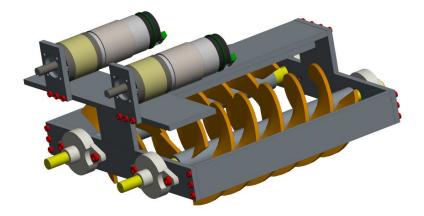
Robo-Weeder with Highlighted Shearing Mechanism.
